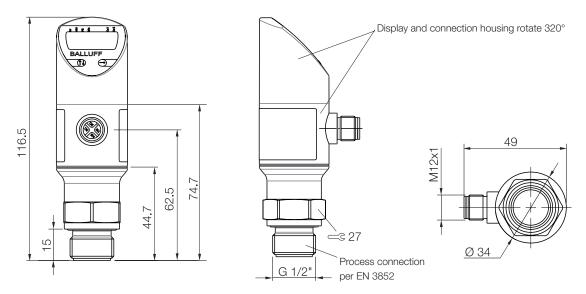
Dimensioned drawing of flush-mounted pressure sensors, up to 50 bar
